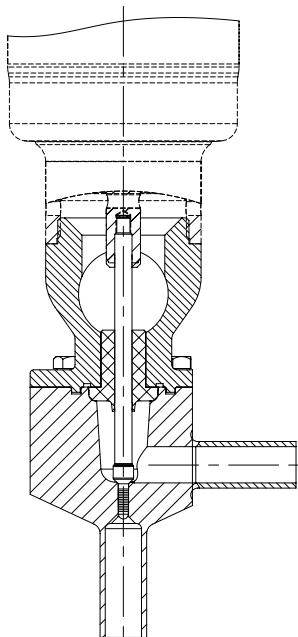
Type 3347/3379 Control Valve with welding ends
